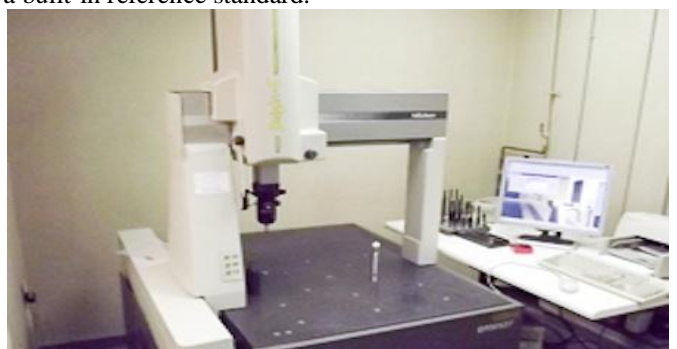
coordinate Measuring Machine(Courtesy: IGTR, Vatva, Ahmedabad)
